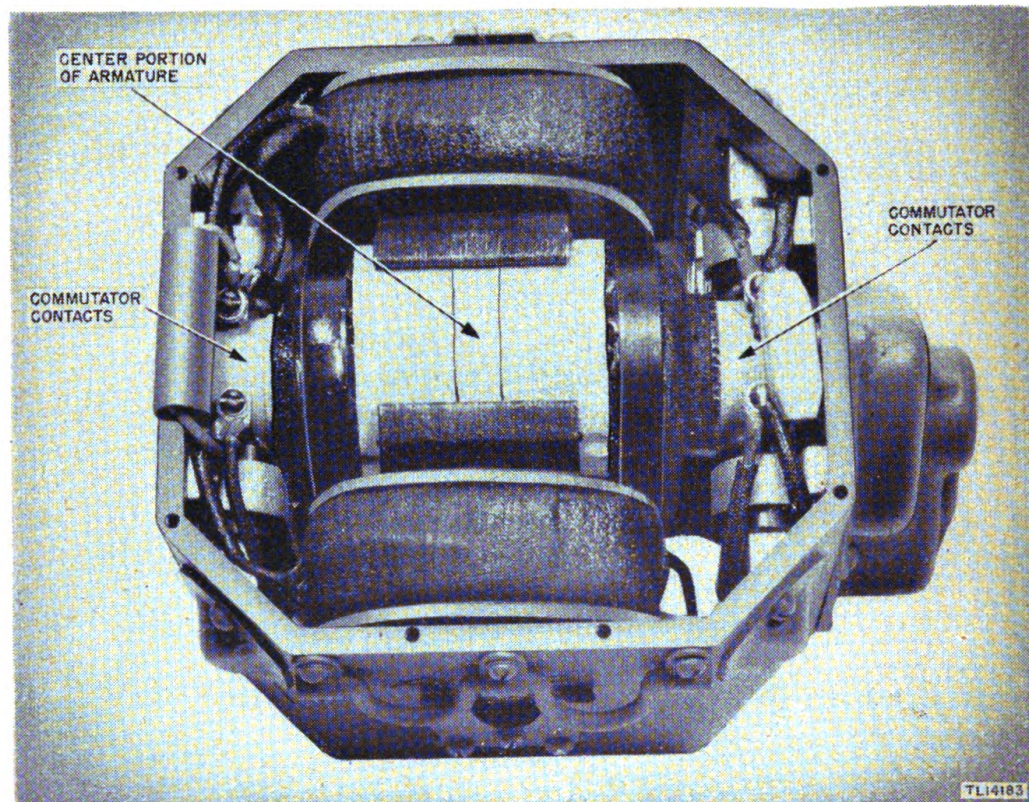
Generator GN-44-()—view with bottom cover removed showing method of masking parts.
